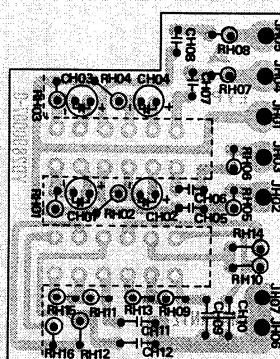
Hi-Filter, Loudness Assembly PH01 Component Locations
